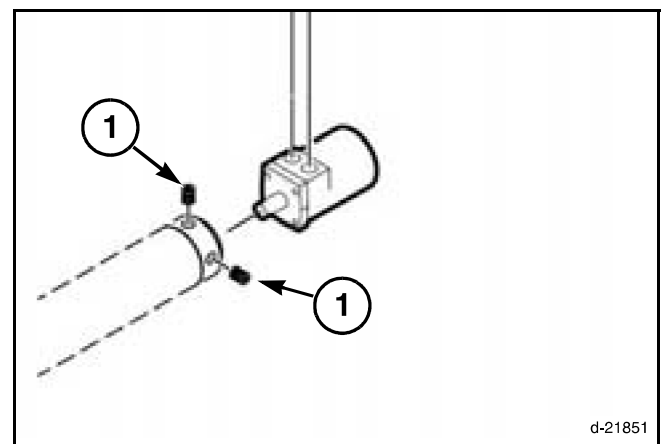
Tighten the two 1/2-20 X 3/4 inch cup point square head set screws (1) holding the motor shaft in the canvas driver roller. Tighten the set screw on the opposite side of the key first.
